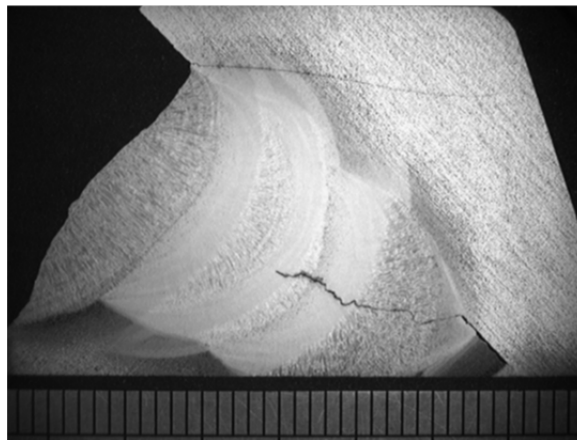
Hydrogen crack initiated from the root of a multipass weld (scale bar is in millimetres) [1.1]
